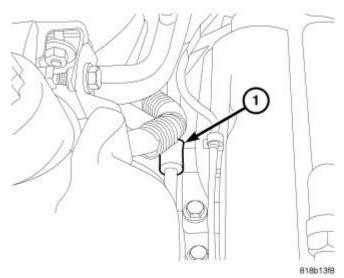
Lower Engine Wire Harness & Nuts Courtesy of CHRYSLER GROUP, LLC
